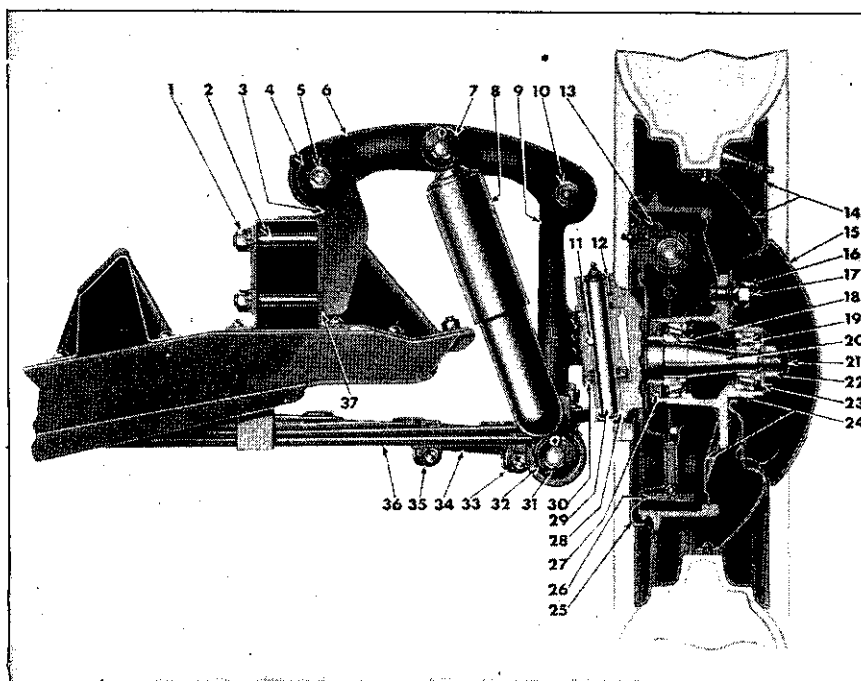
PLANAR FRONT SUSPENSION—SIDE VIEW
